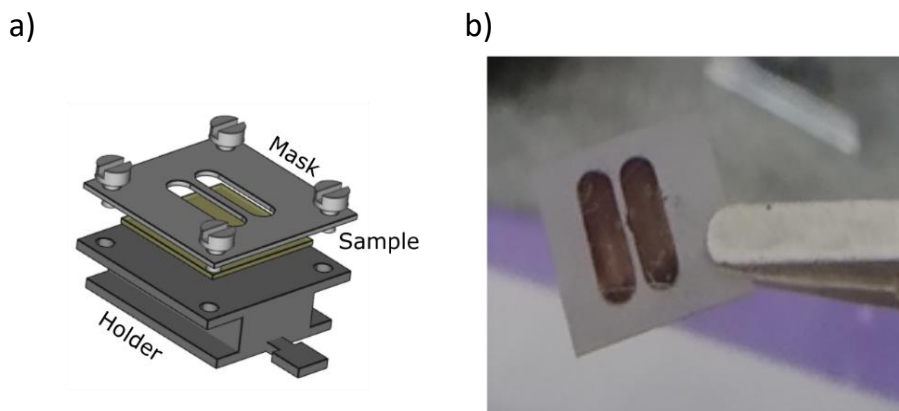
Cu deposition on LiPON samples a) drawing of sample holder and mask arrangement, and b) image of the deposited Cu contacts.
